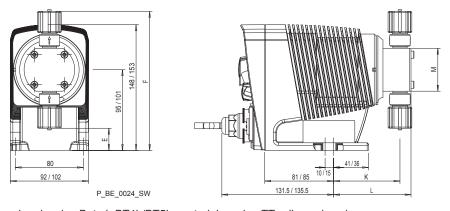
Dimension drawing Beta b BT4b/BT5b, material version TT - dimensions in mm
